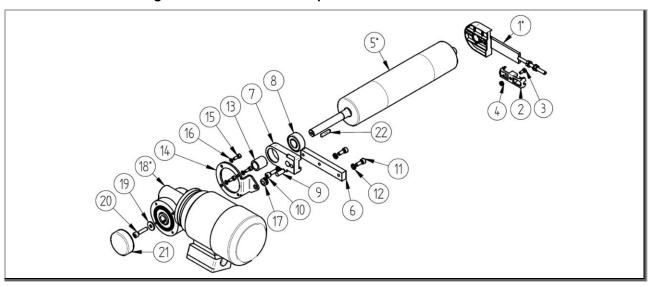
Parts list: Flange drive unit - drive unit - position of drive unit 14 - ZZ.900.0020.02
